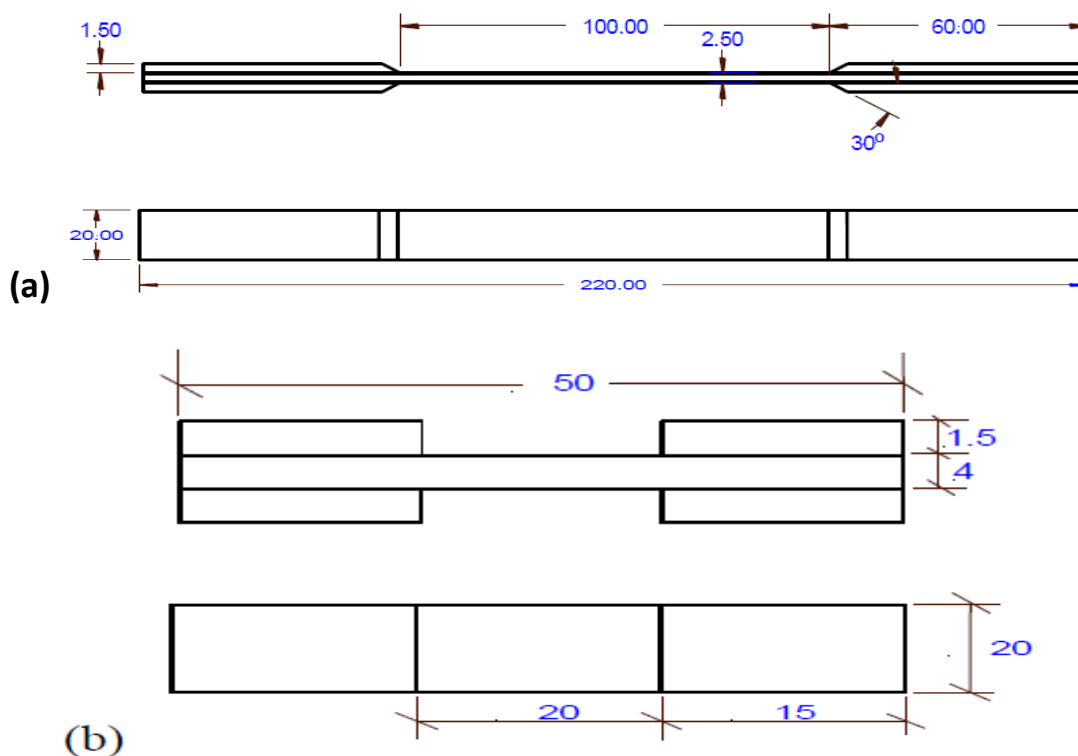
coupon simulation specimen geometry a) tensile specimen b) compression specimen
